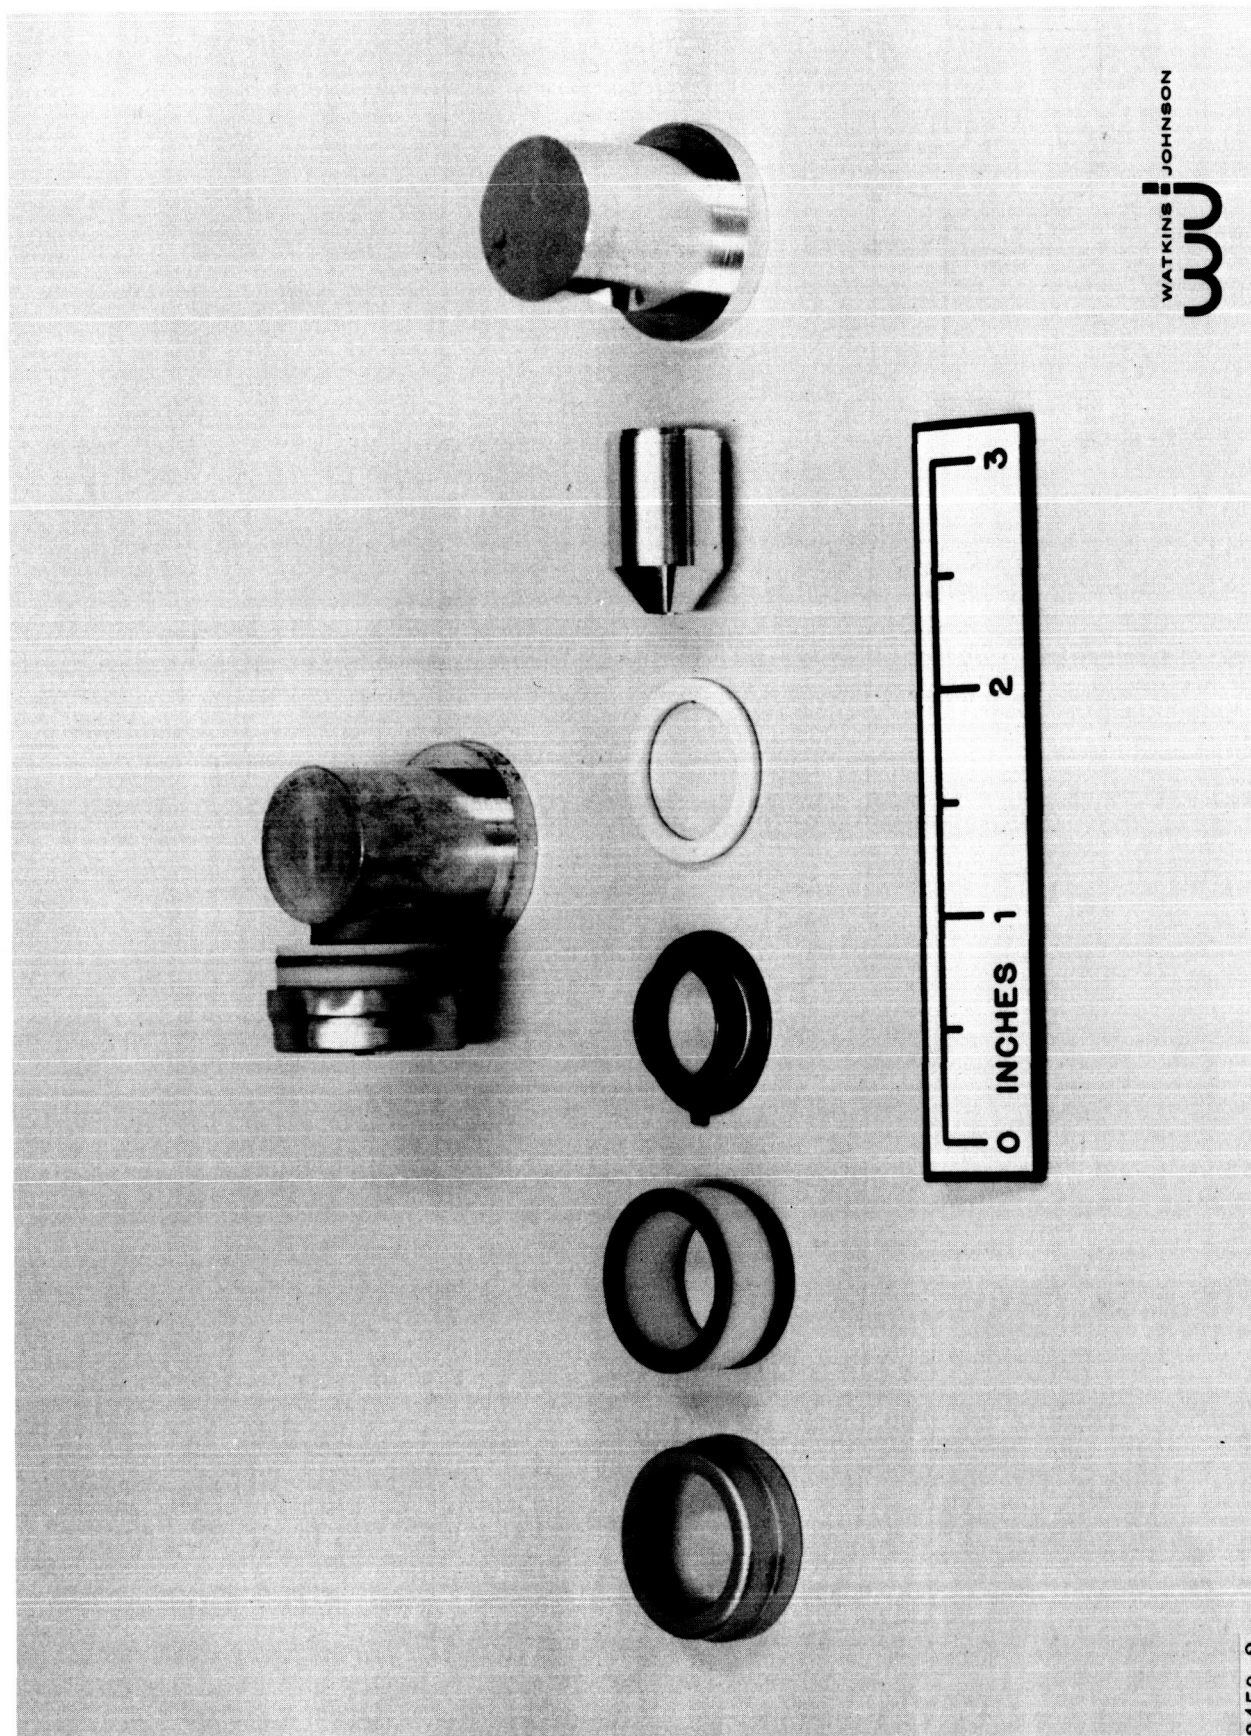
Photograph of an exploded view of the parts making up the new collector which is shown assembled in the background.
